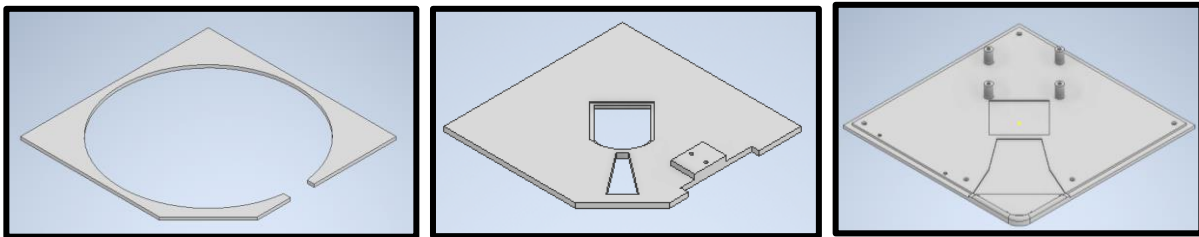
Top Plate, Drop Plate, and Bottom Plate
